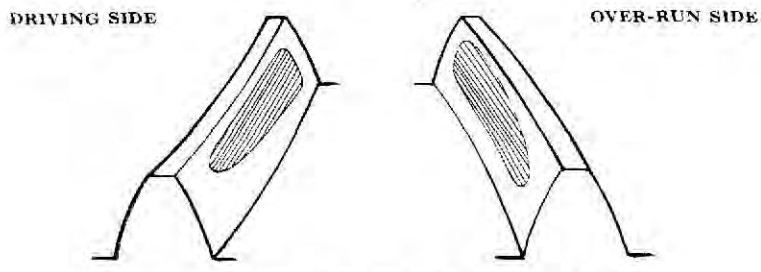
Shows the correct marking on the crown wheel teeth when the gears are tested on the bench without load. If the marking shows higher on the driving side, this can be corrected by adjusting the pinion towards the crown wheel and readjusting the crown wheel for backlash. If the marking shows high on the over-run side of the teeth, the pinion should be taken away from the crown wheel, and the backlash reduced to not less than .008 in.
